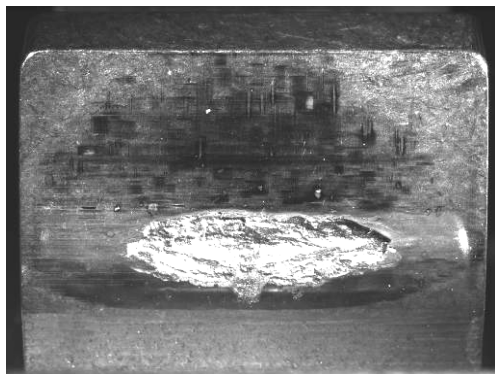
pitting failure in the short duration pitting test with FVA2+4%A99
